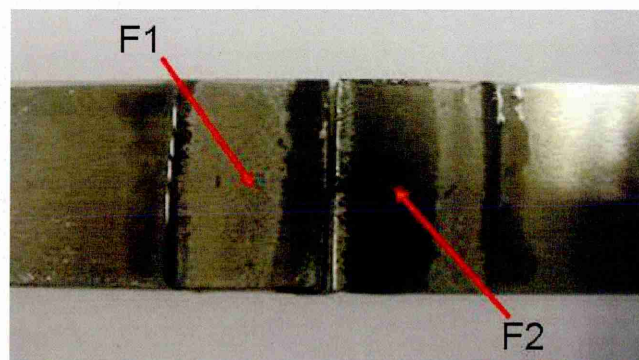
SG3 adhesive fracture surfaces on Al2024-T3 substrate
